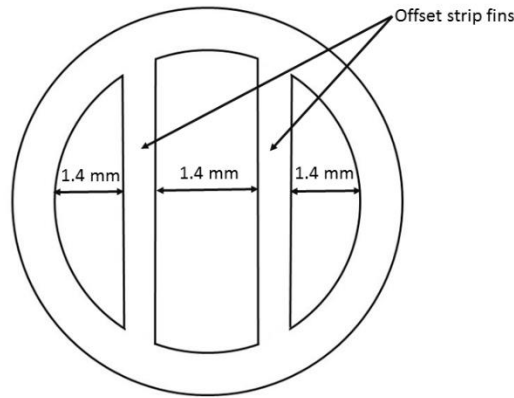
End view of circular tube with offset strip fins and the minimum spacing constraint based on test prints
